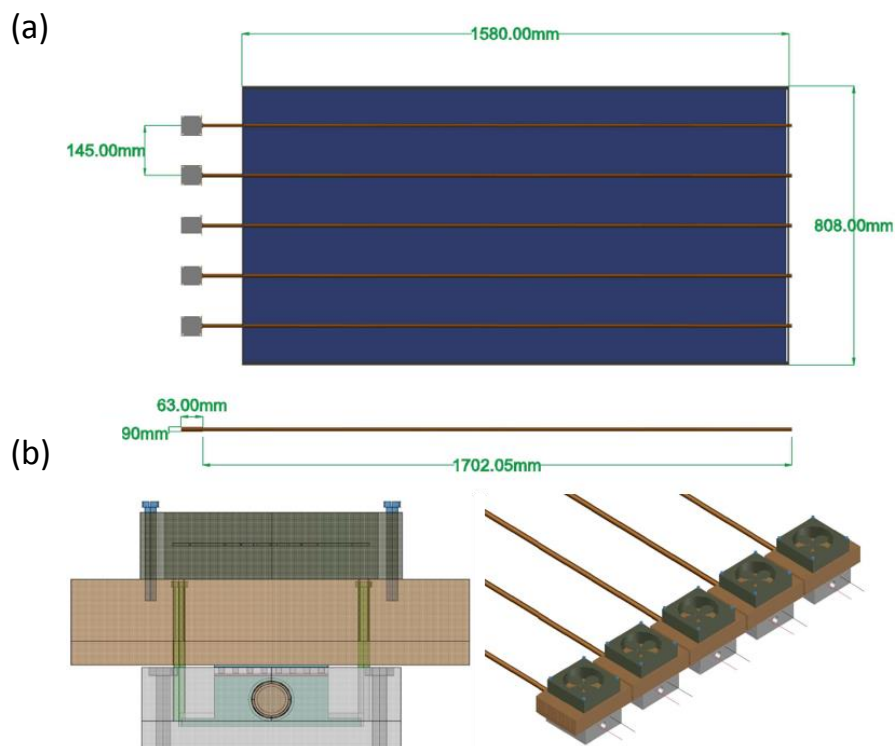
3 (a) Top view of collector proposed showing 5 heat pipes attached at rear. (b) TEG-fan heat sink assembly for waste heat recovery front view and layout
